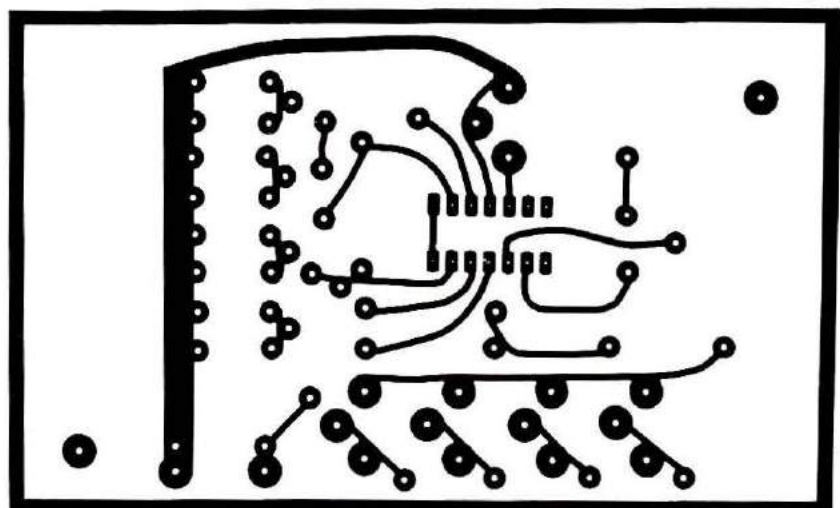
Full size printed-circuit board pattern viewed from the foil side. A component placement guide is shown in Fig. 5.
